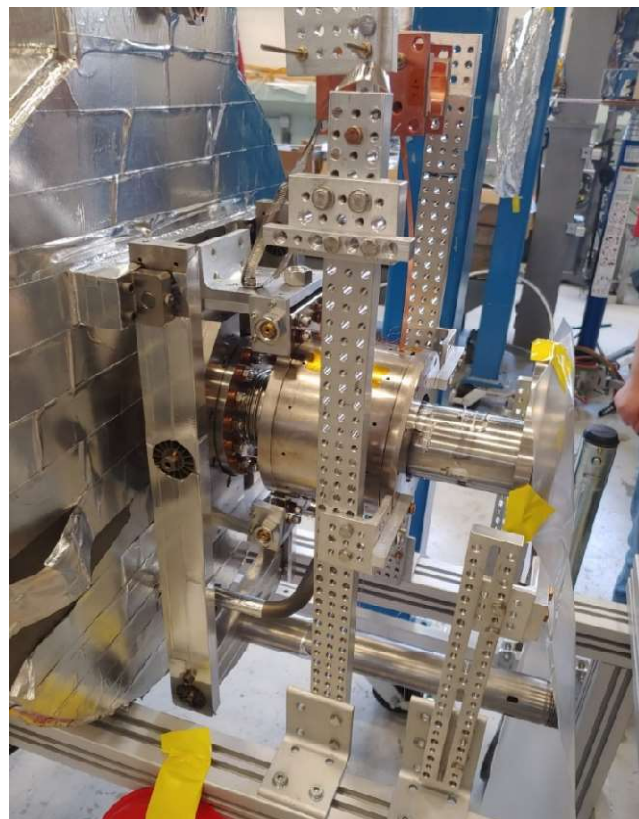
Temporary fixture setup for solenoid and beam tube removal. Solenoid support has been removed from cavity jacket and the solenoid has been slid away for access to the cavity flange bolts. Note the fixture provides support for the superconducting current leads.
